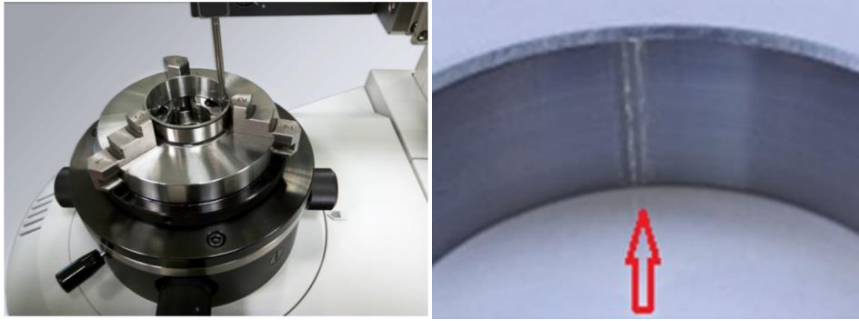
Measurement of the outer ring of the tapered roller bearing with grinding defect of 1.2492 mm (left) and its enlarged image (right)
